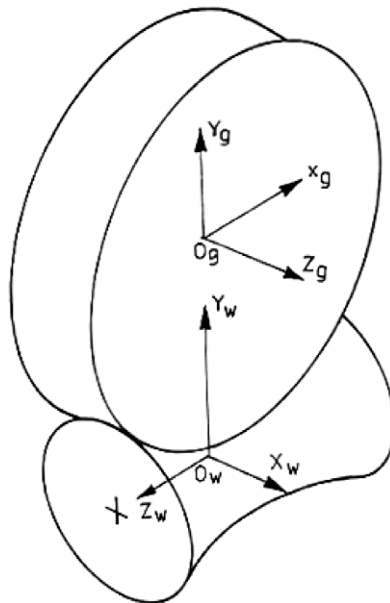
Coordinate frame for double enveloping worm gear drive.
